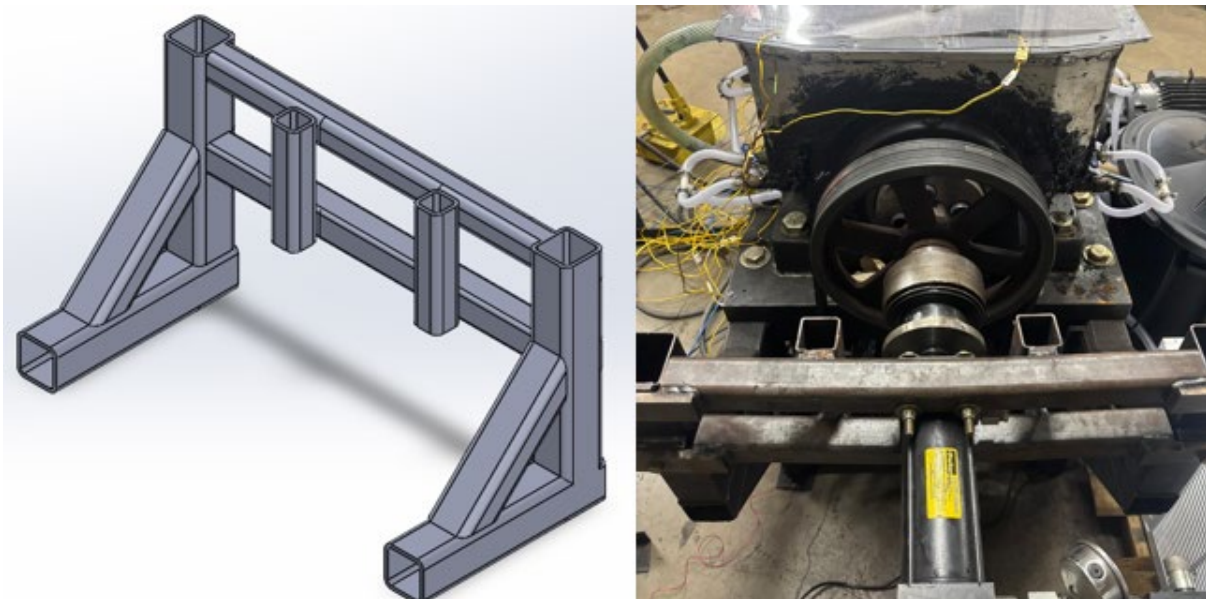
Rear ram CAD assembly (left) and experimental assembly (right)
